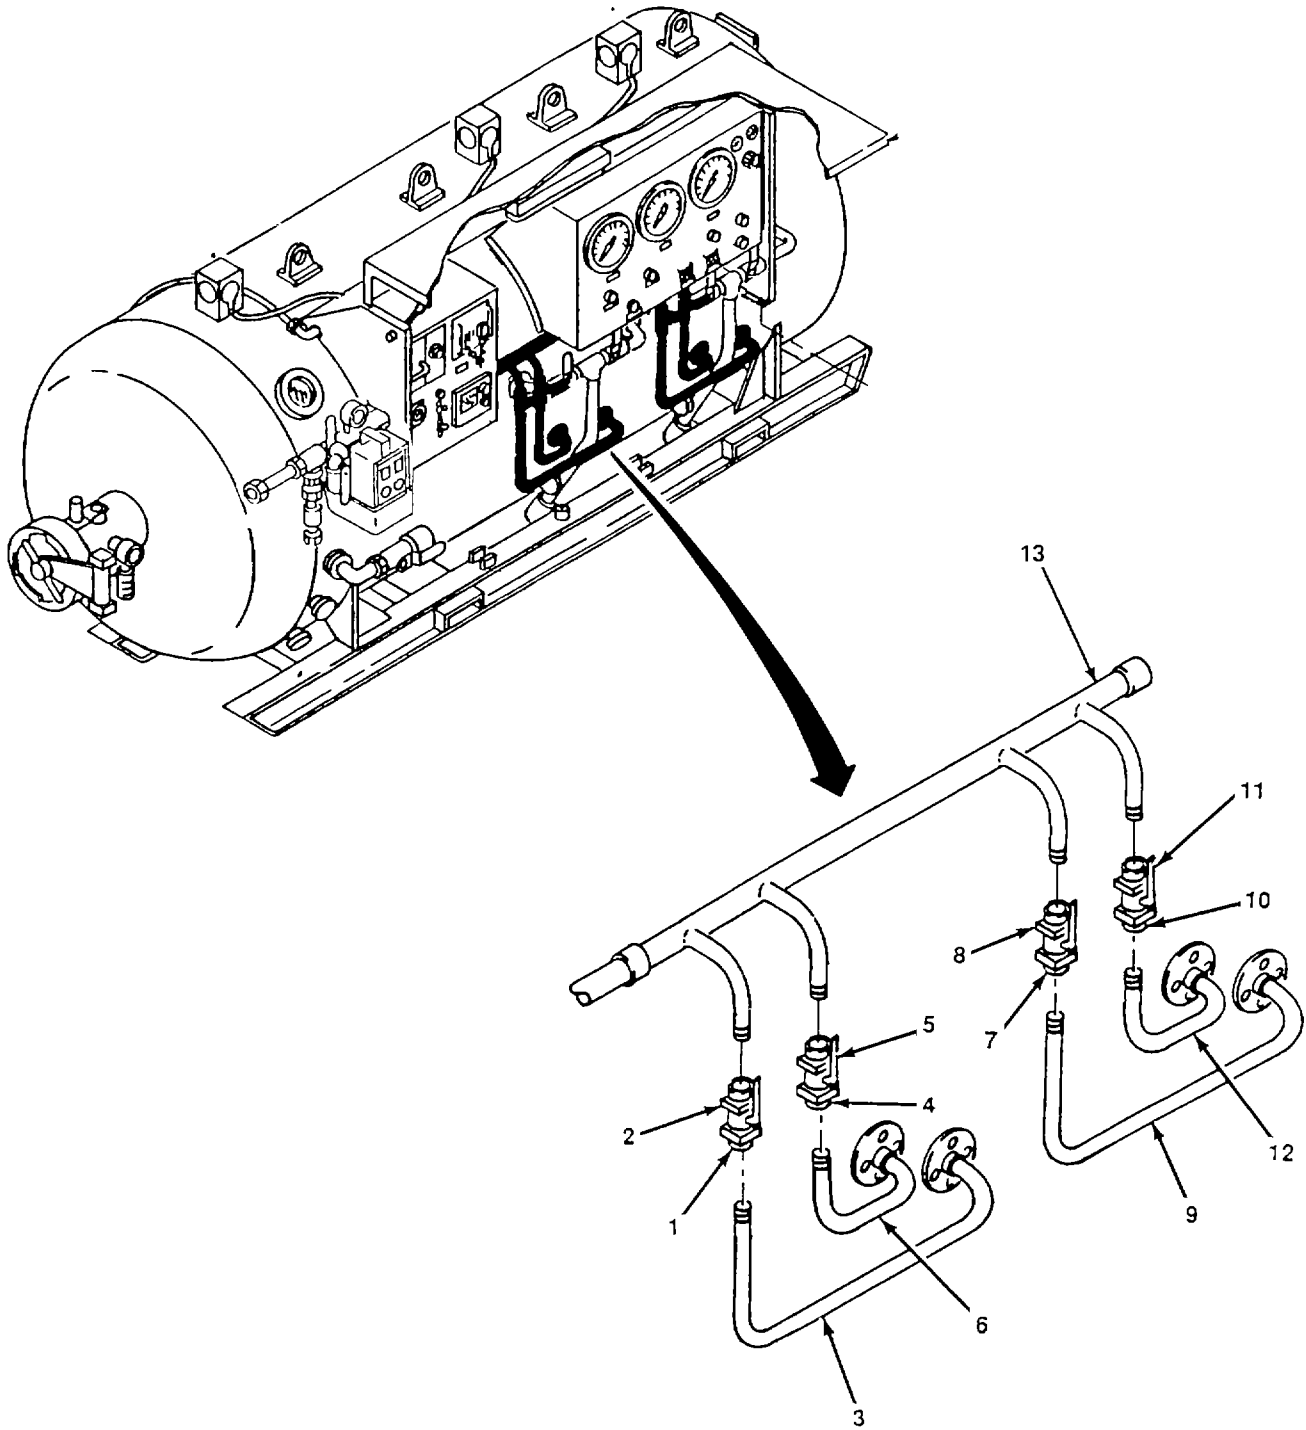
Ball Valve 3/4 Inch, Replace.
